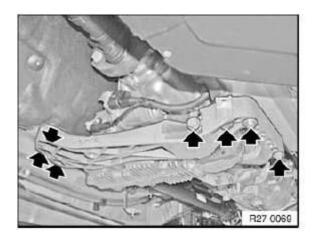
Locating Transmission Cross-Member Bolts Courtesy of BMW OF NORTH AMERICA, INC.
